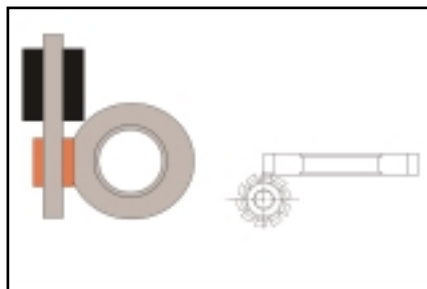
Hob slide retracts hob from depth at top position, moves to bottom face of part, positions hob, and radially feeds to depth, completing the chamfering cycle.
